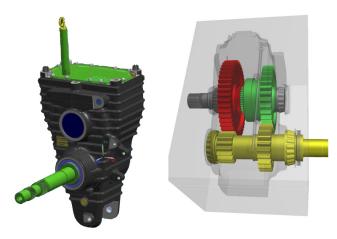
Speed reduction gear box, part of the rotor drive transmission change for a forage harvester machine.
